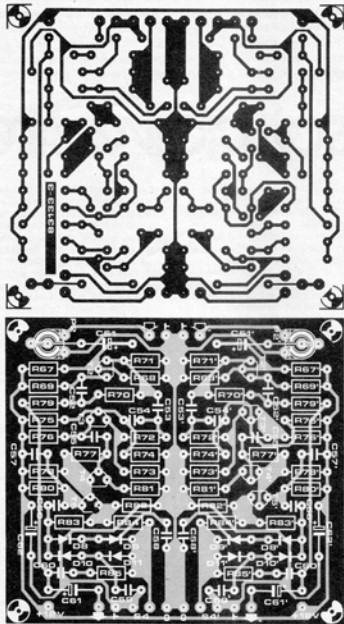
Layout and component side of the DNL board: as the DNL should be suitable for stereo, the board consists of two symmetrical halves.
